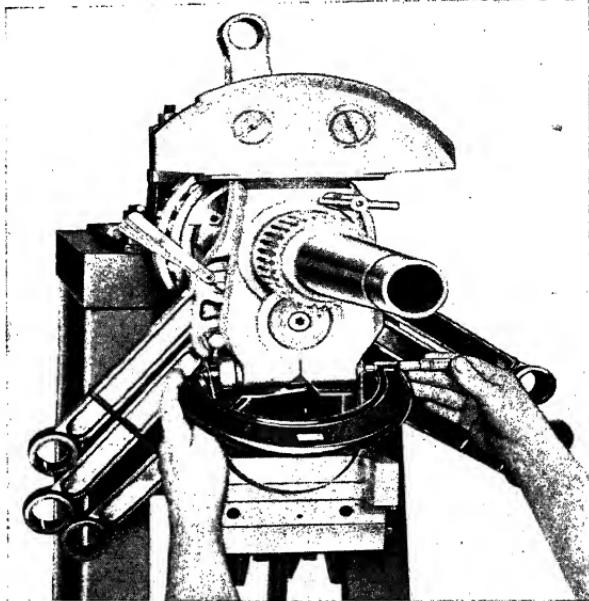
Measuring the stretch of a bolt due to tightening.
